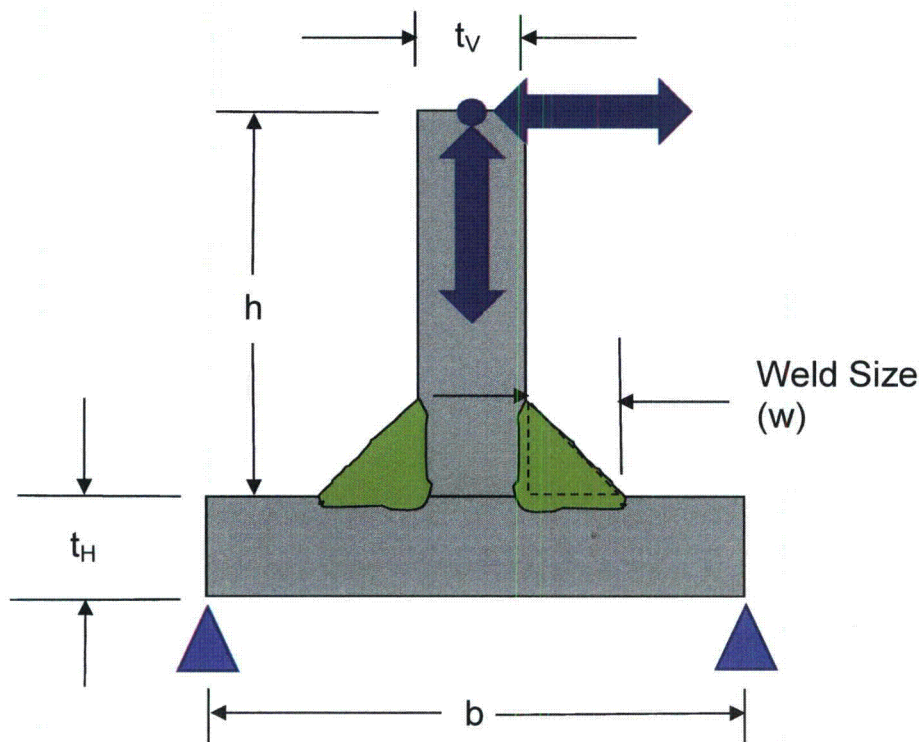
Double sided fillet welded T-joint with nomenclature for analyses
